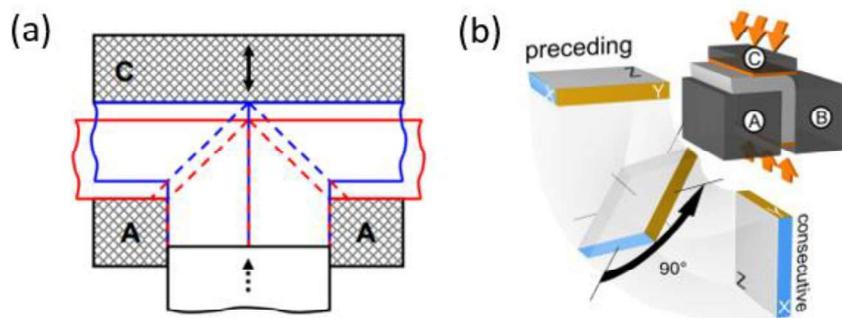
Double billet I-ECAP [90] (a) and I-ECAP adjusted to plates processing [91] (b)
